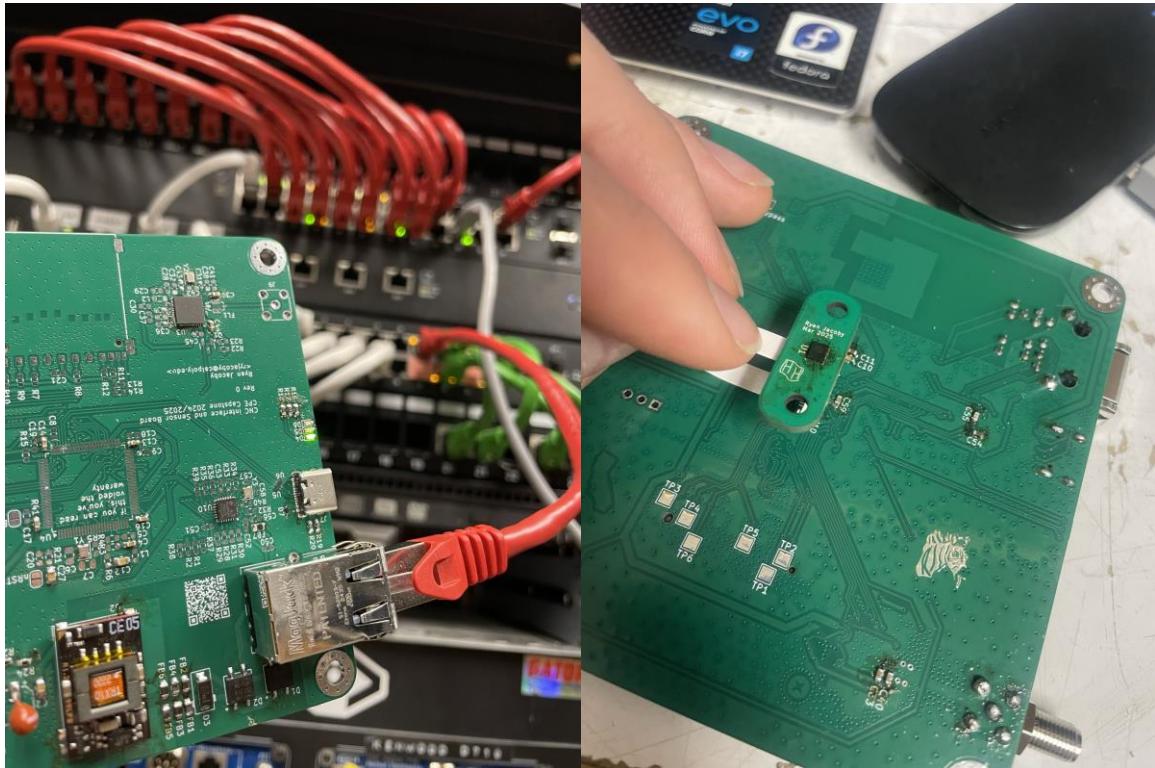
PoE Verification (left), Breakout Assembly on HW Bottom (right)
